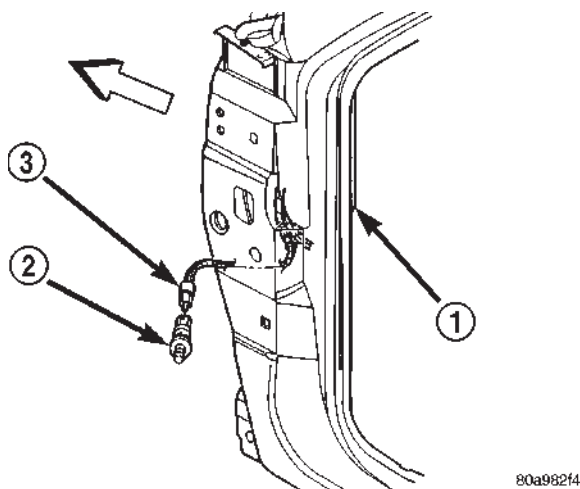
DOOR AJAR SWITCH REMOVE/INSTALL
